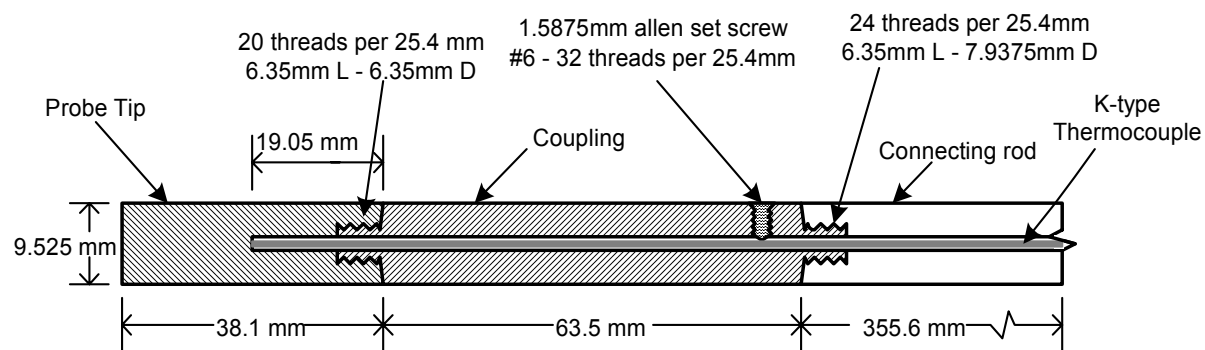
CHTE quench probe-coupling-connecting rod assembly [2]
